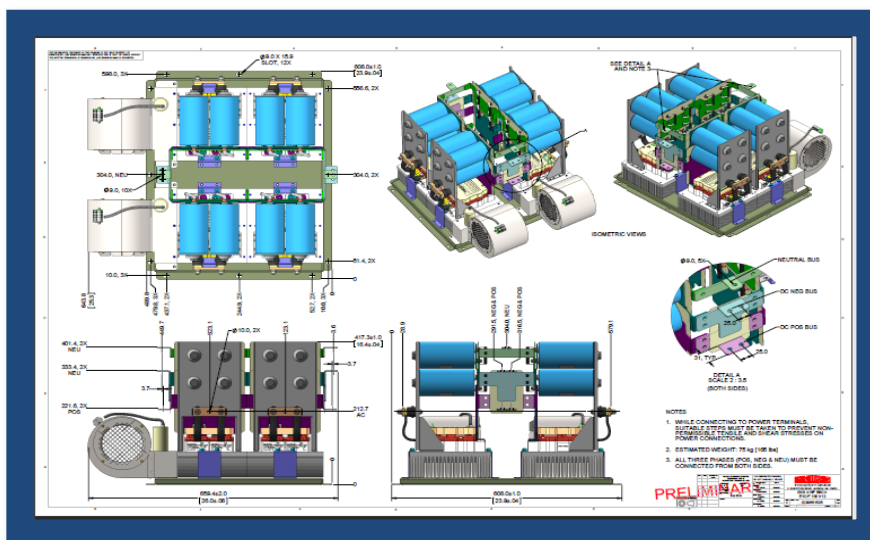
SKiiP1013 inverter assembly including gate driver, heatsink, capacitors, fan and bus dc sensor
